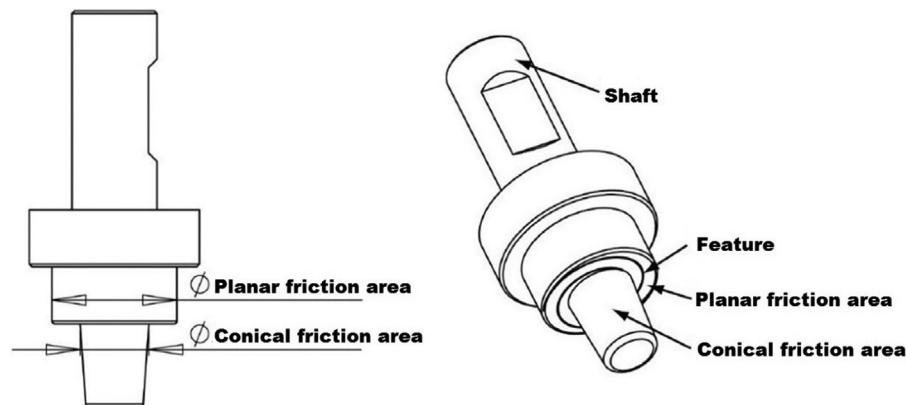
Schematic illustration of an HFDB tool for joining CWHE tubes to tube sheets.
